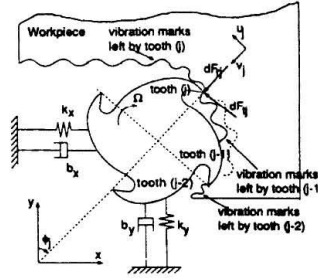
Cross Sectional View of an End Mill Showing Differential Forces [4]
